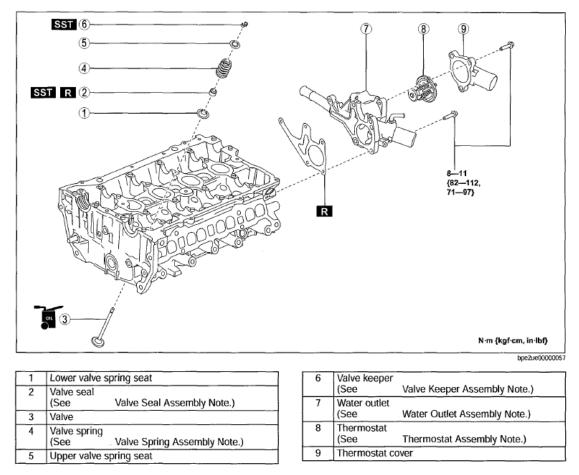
Assembling Order Of Cylinder Head Assembly (I) With Torque Specification
